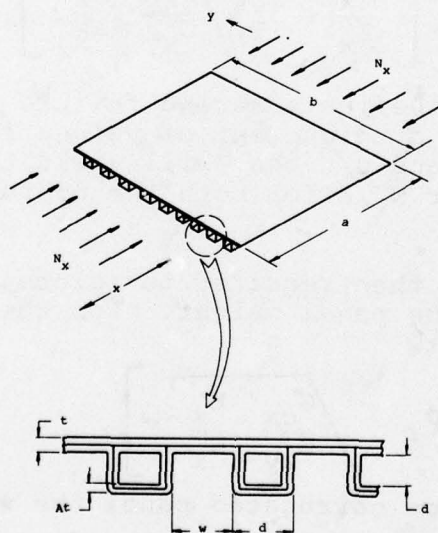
Single-Face Corrugated Skin Panel - Dimensions and Coordinate System.
